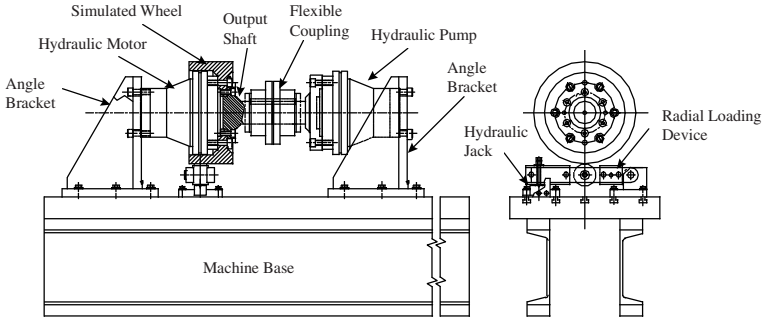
Hydraulic test rig schematic. (Courtesy of Foster-Miller)
